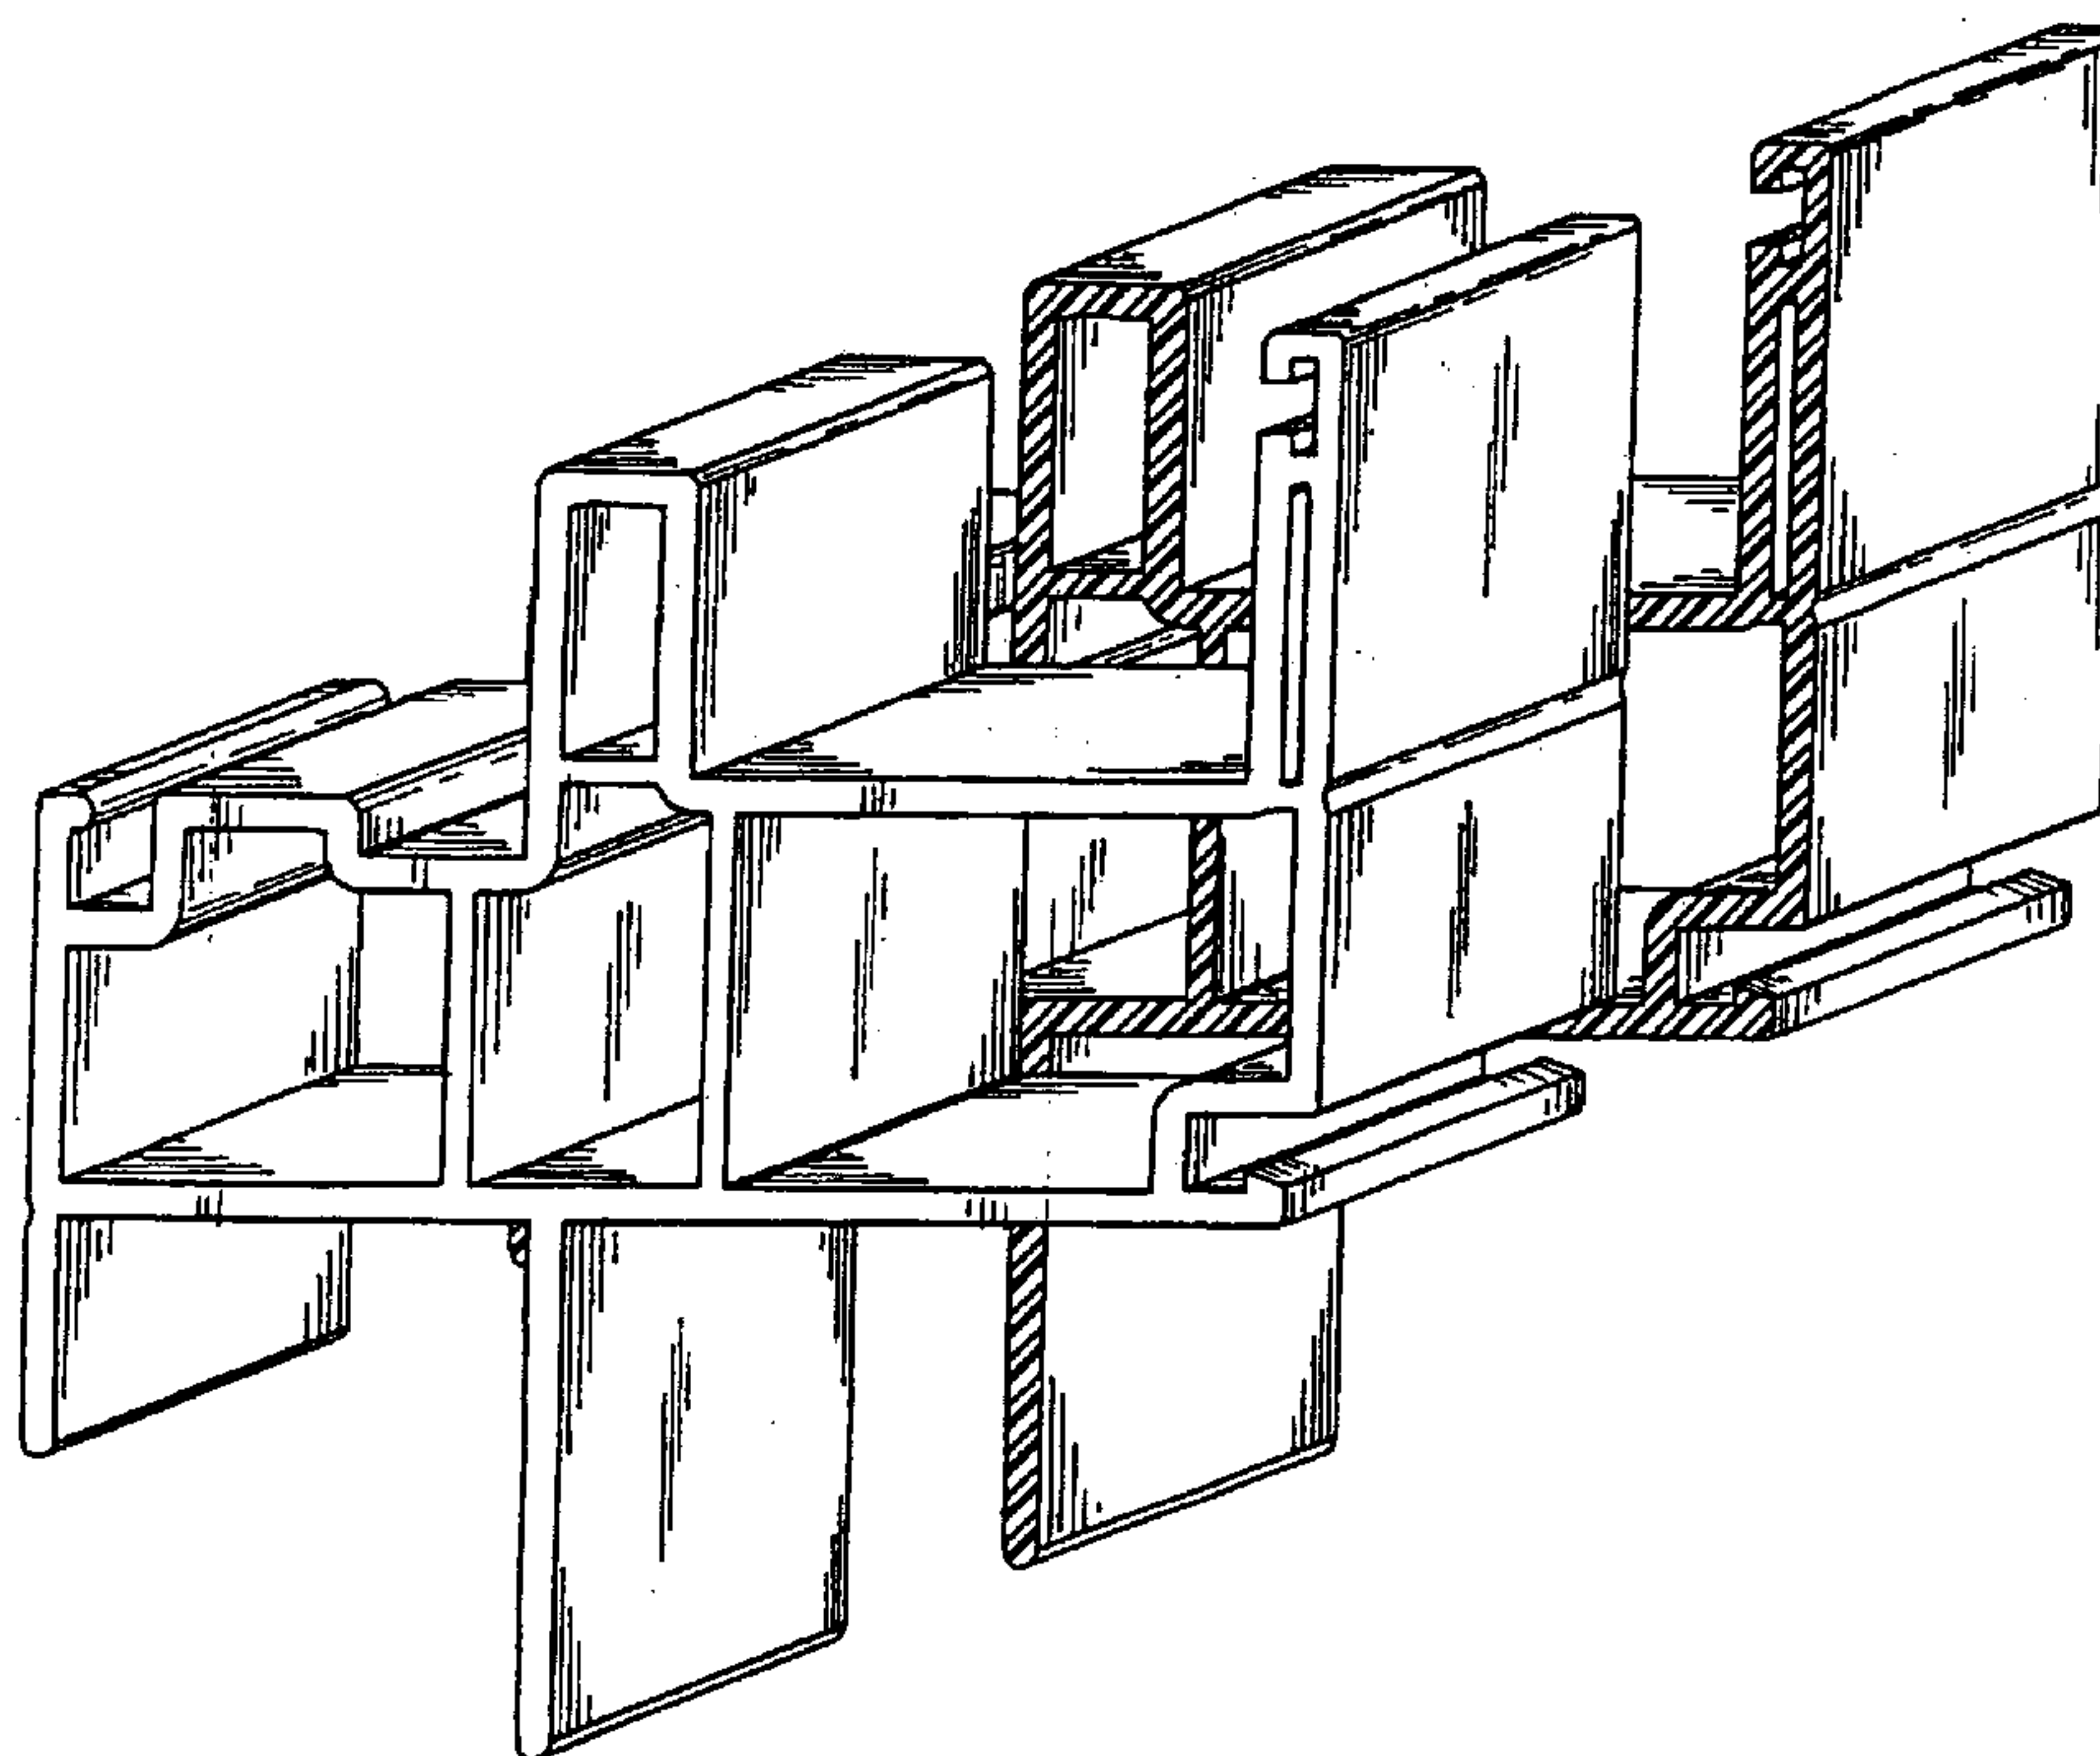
is a top right perspective view of a second embodiment of the window component extrusion which is broken in the center indicating indefinite length.
